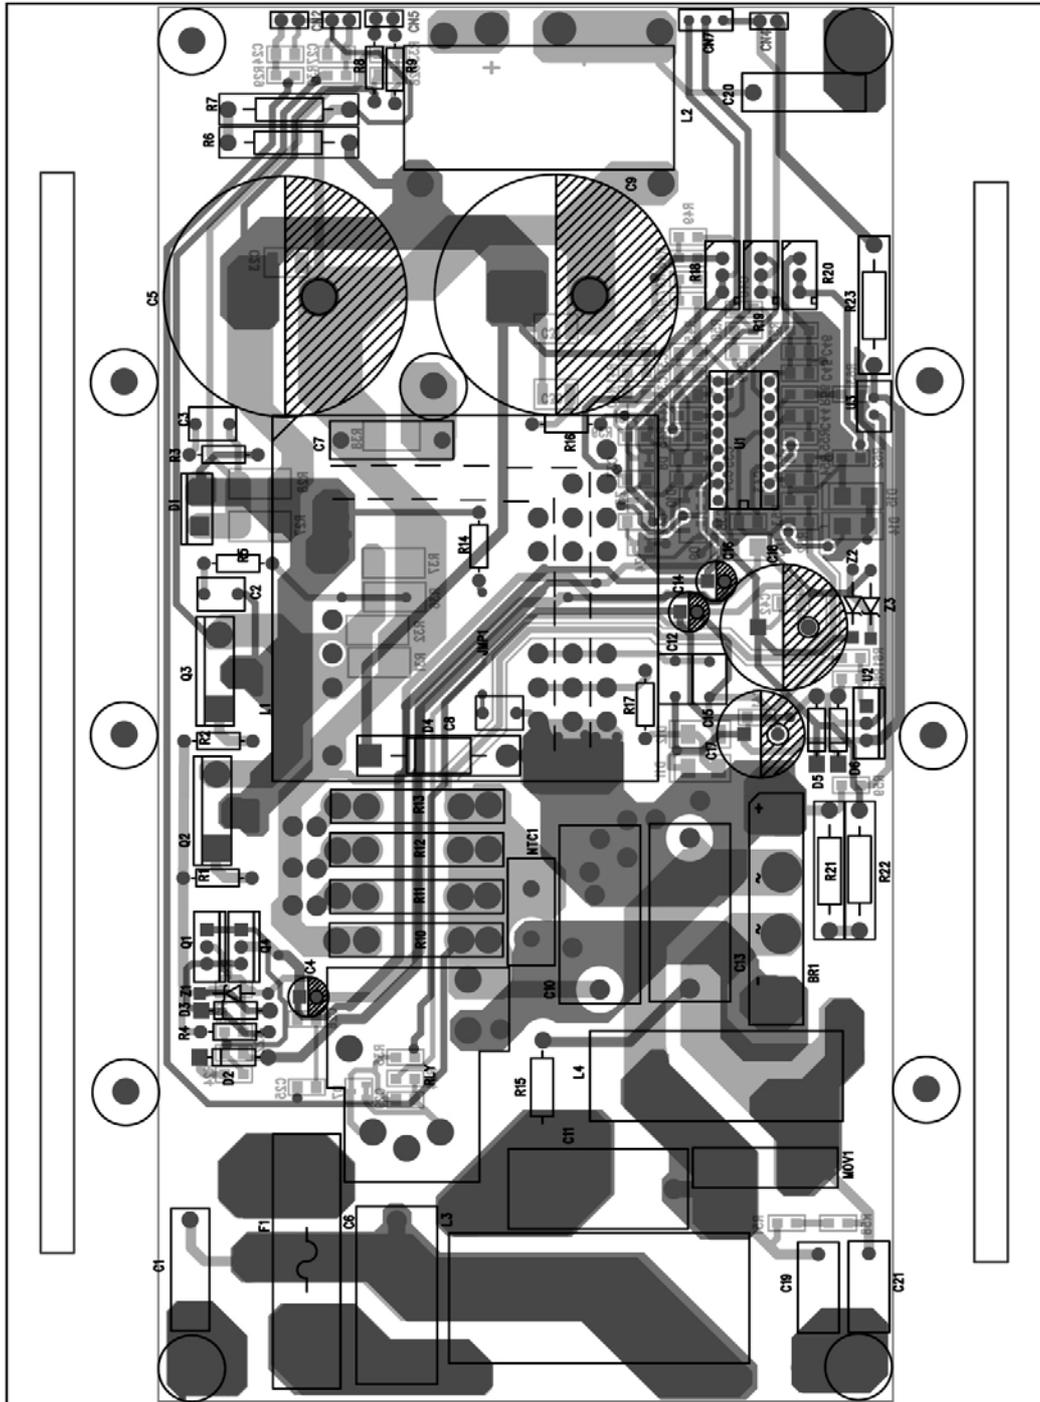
PCB layout of the 1200 W PFC circuit prototype.
